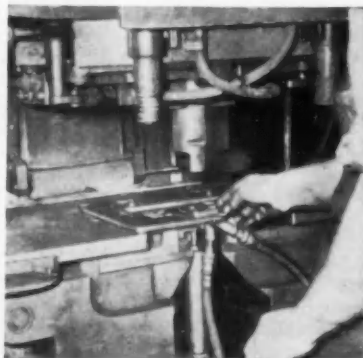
Close-up of simple tooling required for a baler pick-up crank assembly.
